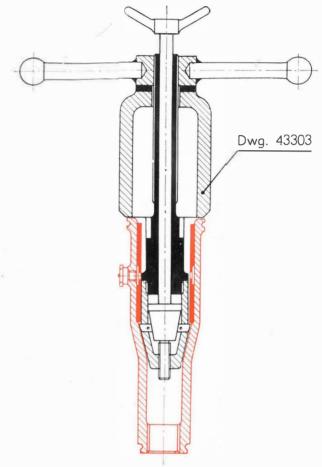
Detailed drawing showing how to extract the bushing of the torsion bar lever.
